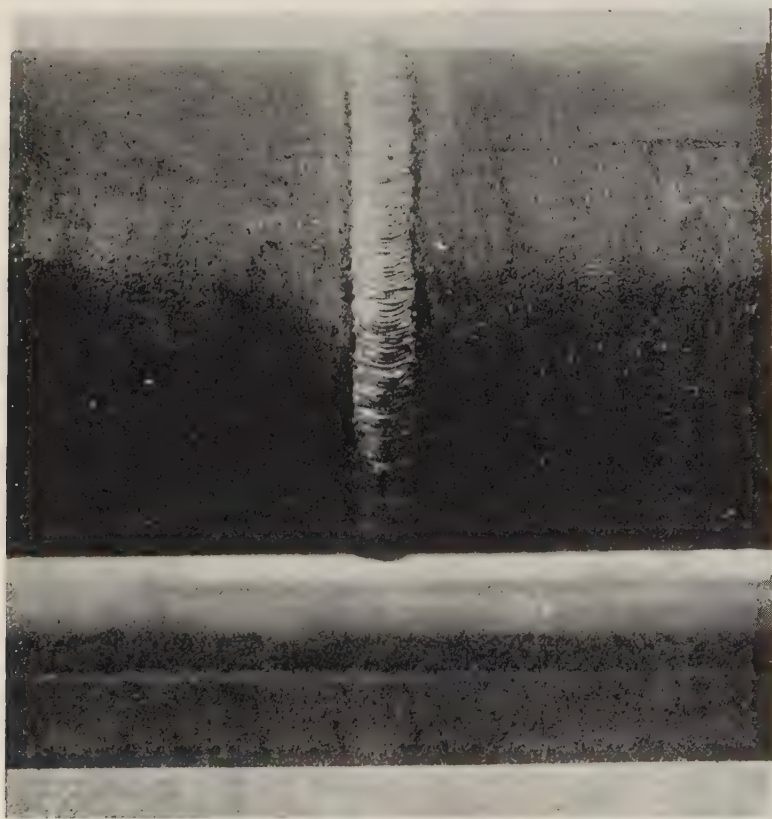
A TYPICAL JOINT BRONZE WELDED ON 12-INCH CAST IRON PIPE
